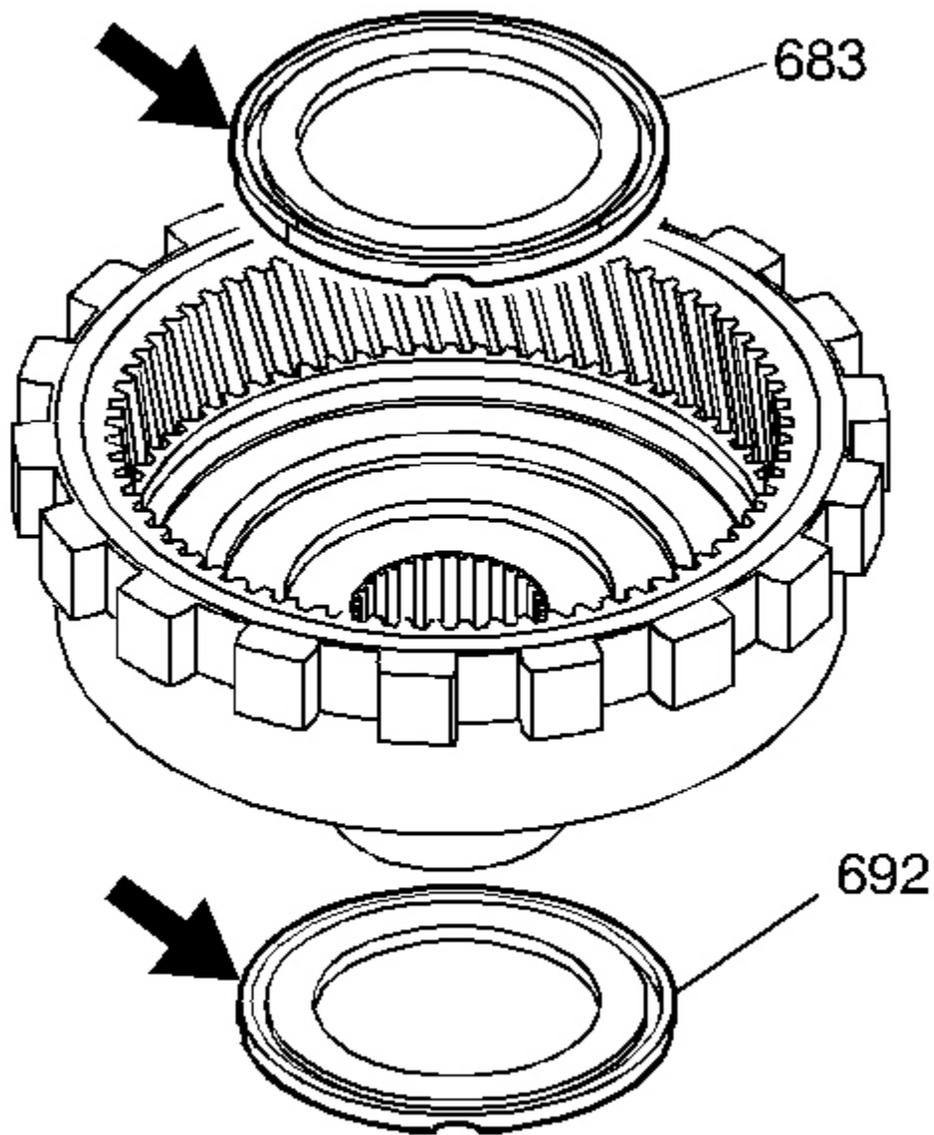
Reaction Carrier/Support Thrust Bearing Assembly & Reaction Gear Support To Case Bearing
